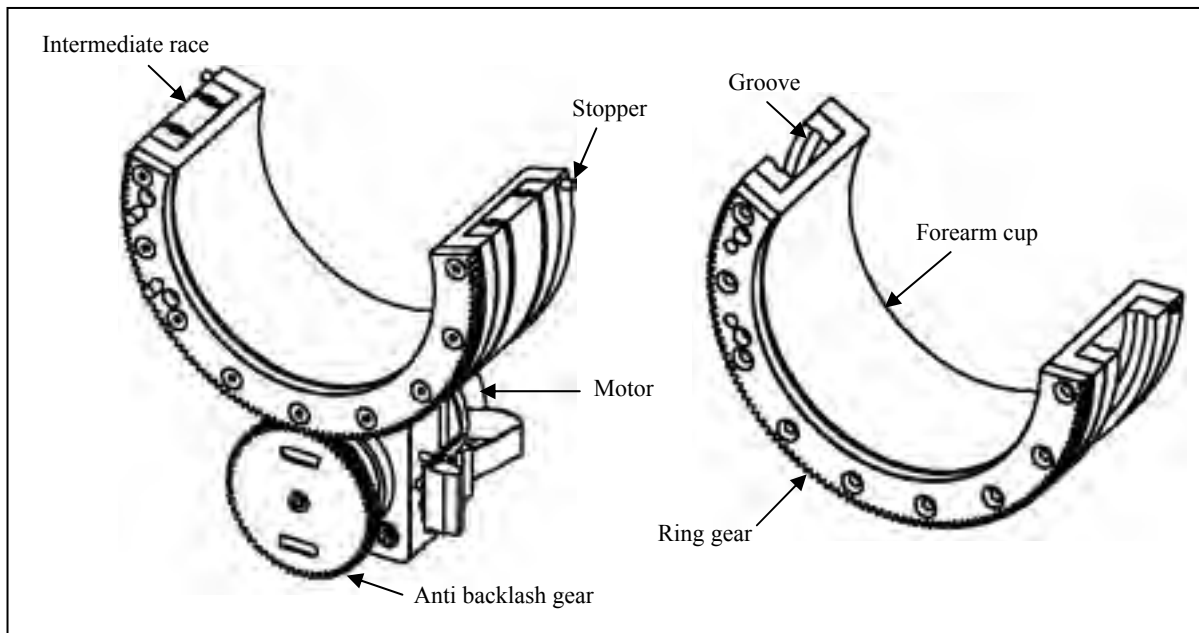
Forearm motion support part, showing the gear arrangement and forearm cup assembly to the fixed outer ring
